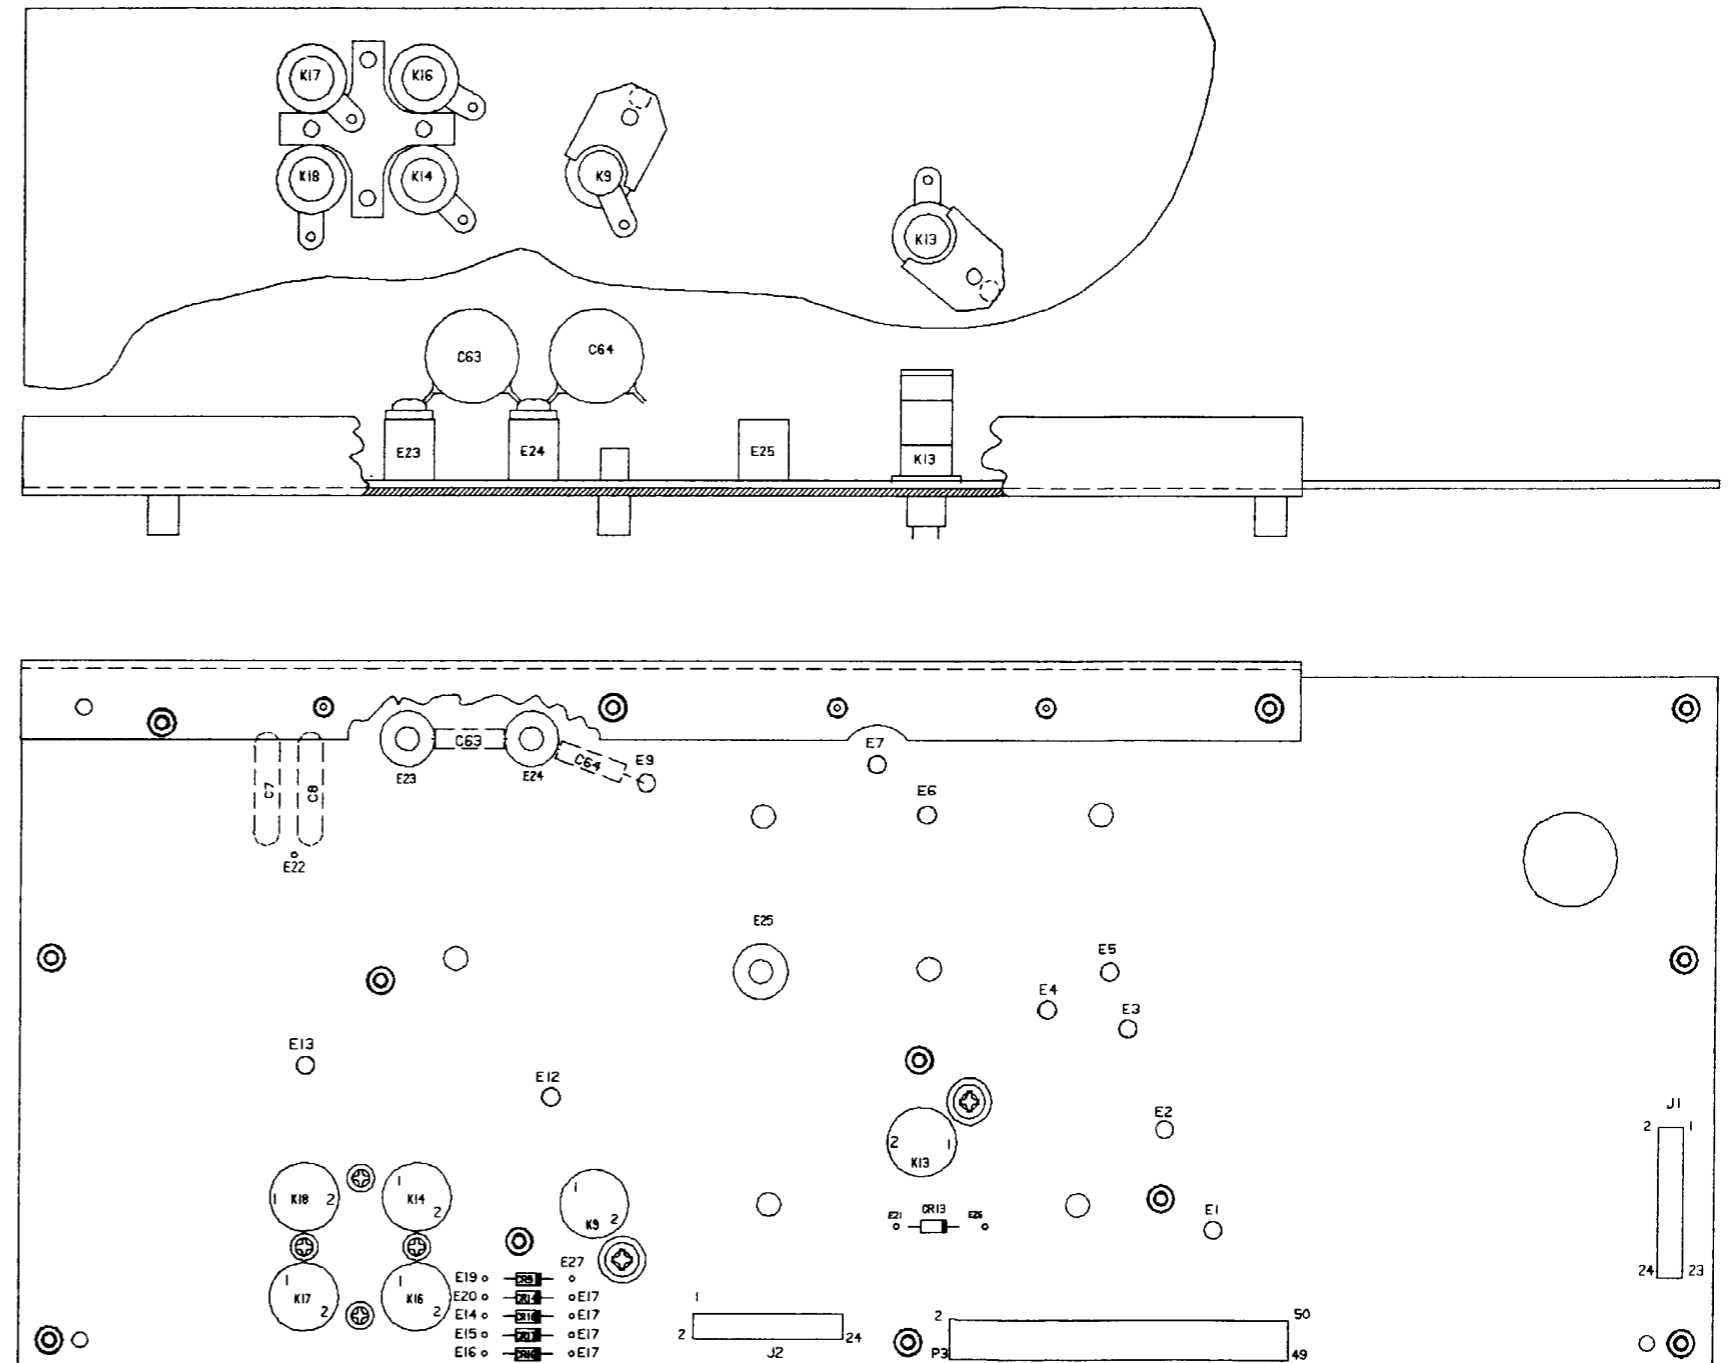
A9A1 RF Interface PWB Assembly (10208-5260) Component Locations
